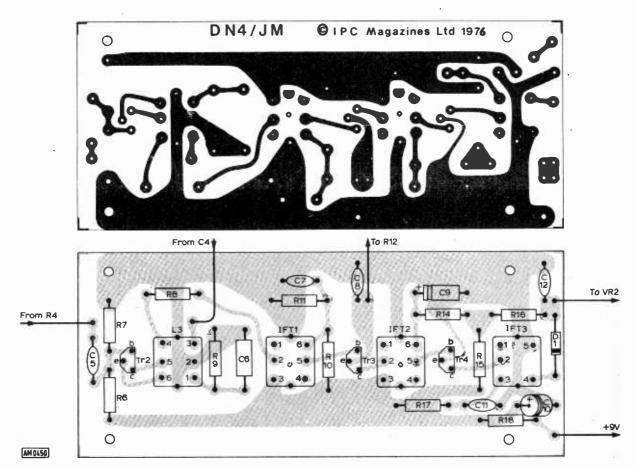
Foil side and component side views of the Osc|IF board. Both are shown full size. If the board is to be tested outside the receiver, VR2
